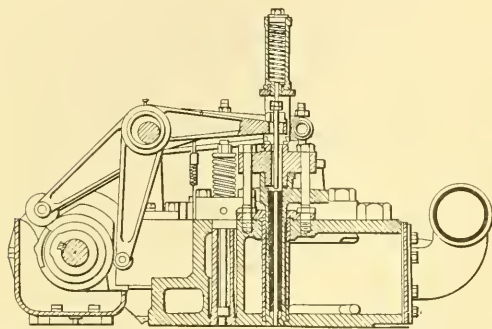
SECTION OF WILLANS-ROBINSON CYLINDER HEAD
